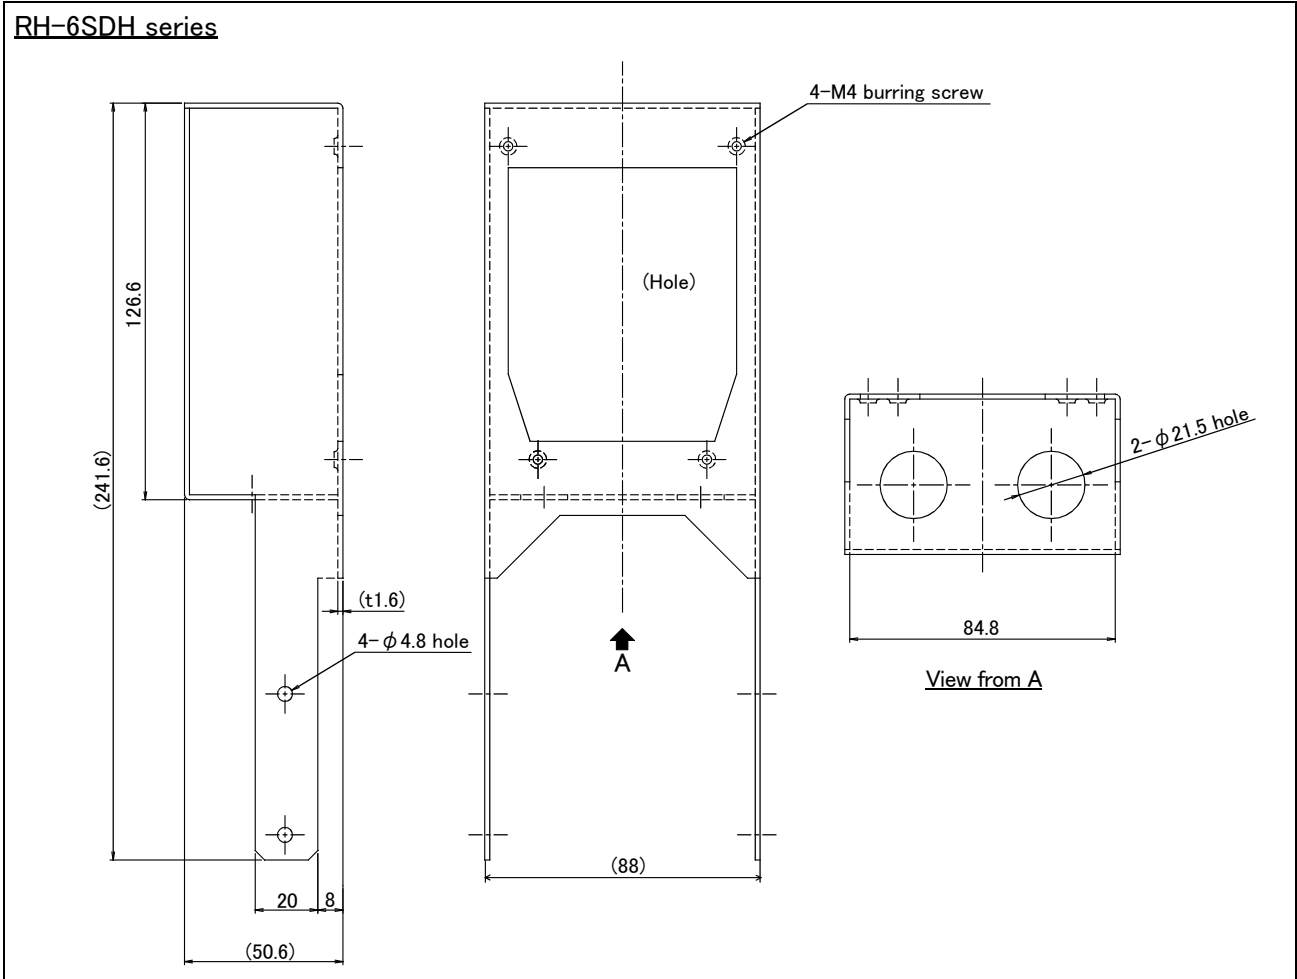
Outside dimensions of solenoid valve box (RH-6SDH series)
